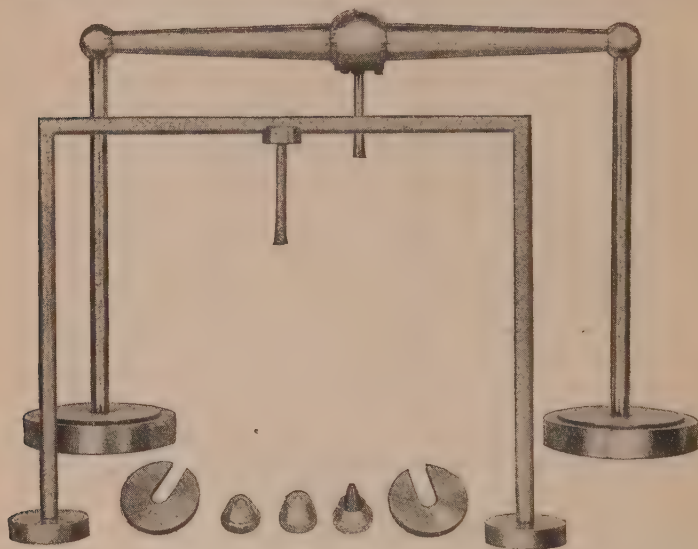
A Brinell Machine Attachment for Use with Small Specimens.
